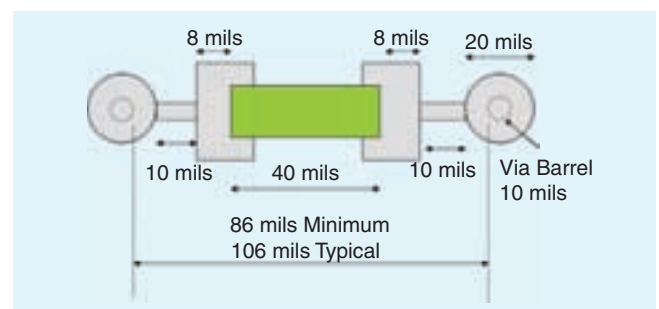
Typical Minimum 0402 Capacitor Mounting Dimensions
